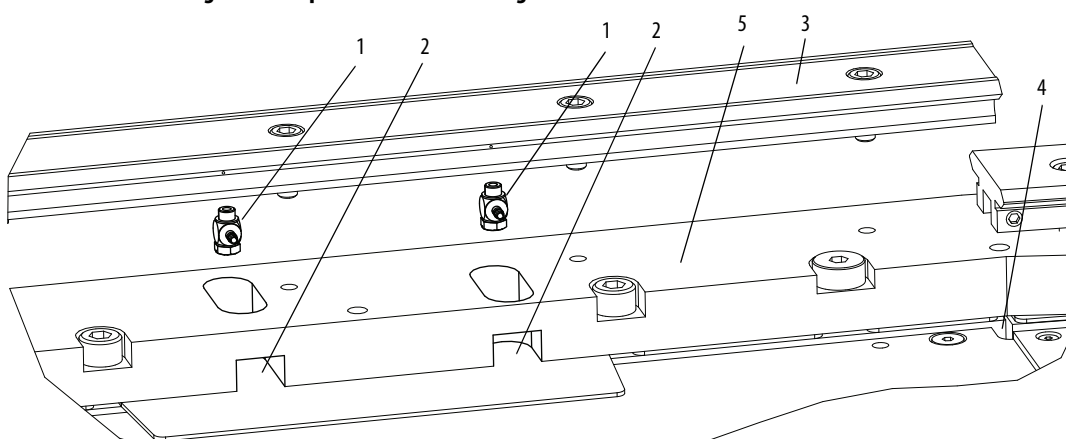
Bottom Track Oil Bleed Fitting and Access
